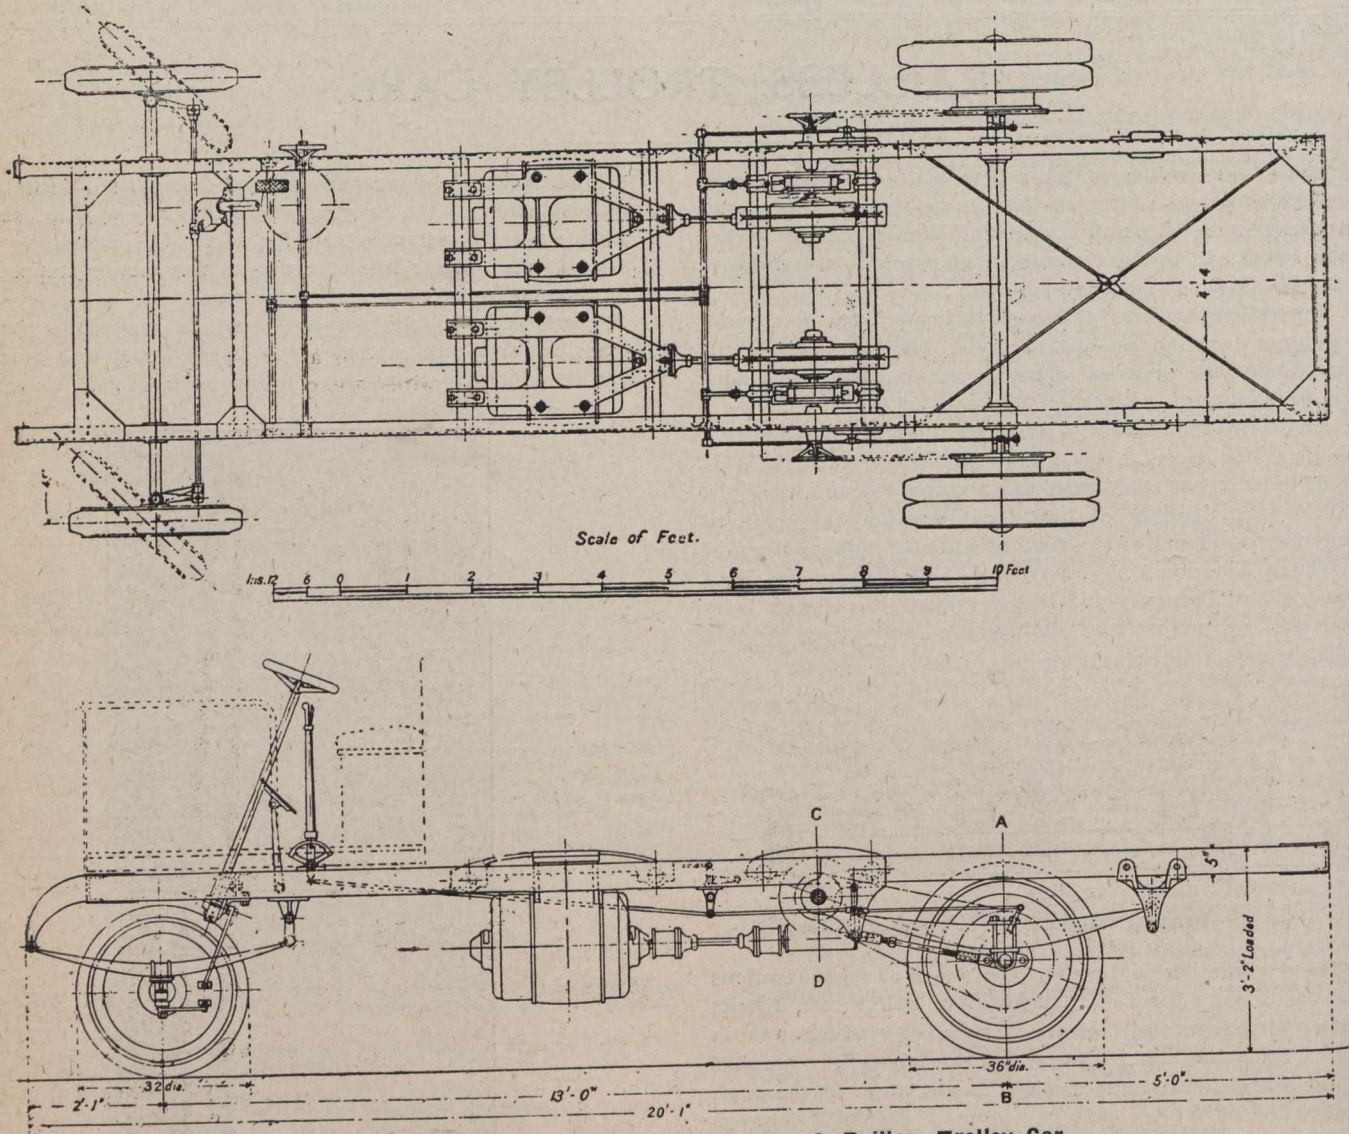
Plan and Side Elevation of Chassis of Railless Trolley Car.
